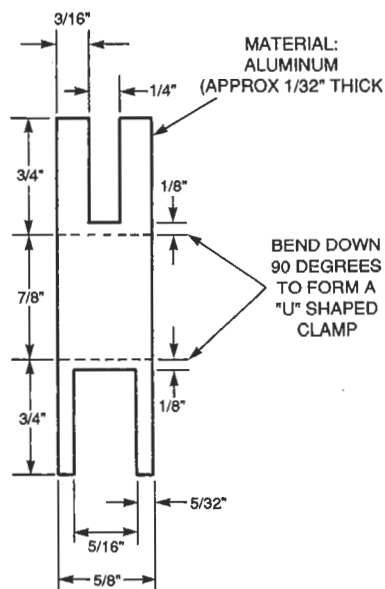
The coupler retaining clip holds the universal-shaft-coupler components together. One clip is required for each motor/rod assembly.
